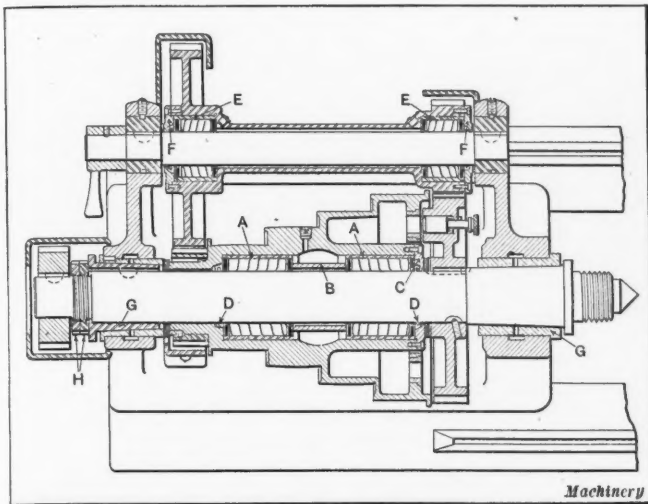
Lathe Head with Spindle mounted in Plain Adjustable Bronze Boxes. Self-lubricating Feature, and Cone-pulley and Back-gear Shaft carried by Roller Bearings to reduce Friction, give Durability and eliminate Lubrication Troubles
